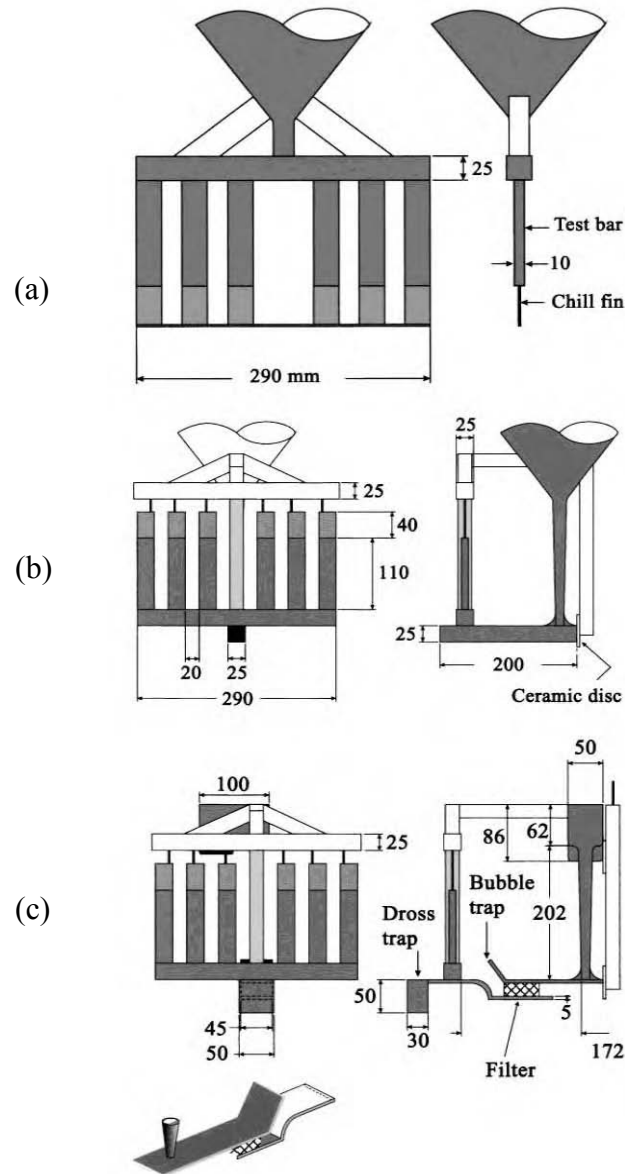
43. Schematic view of (a) top filled, (b) bottom filled, and (c) controlled bottom filled mould designs; all dimensions in mm (Cox et al., 2003).
